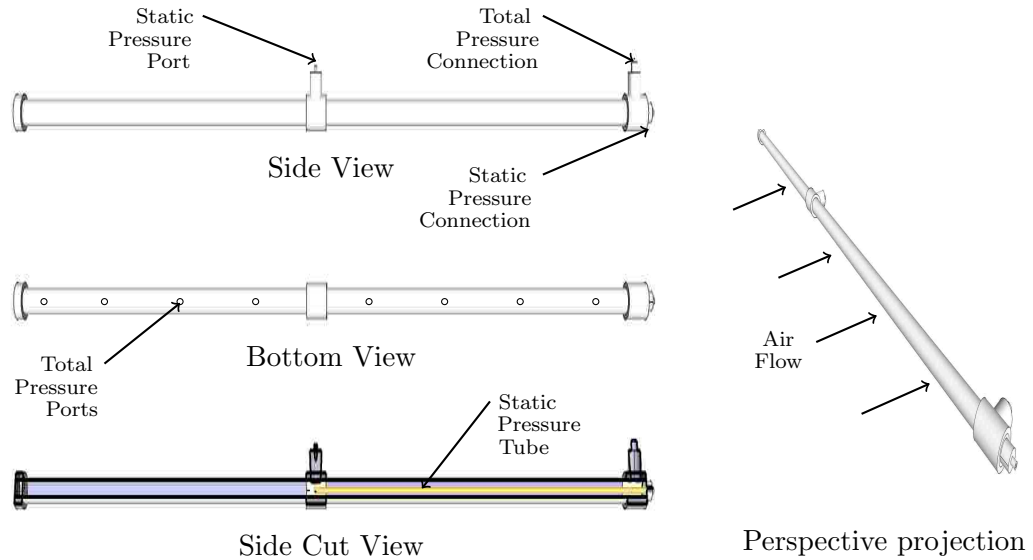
Pitot tube design described with side, bottom, and cut views
